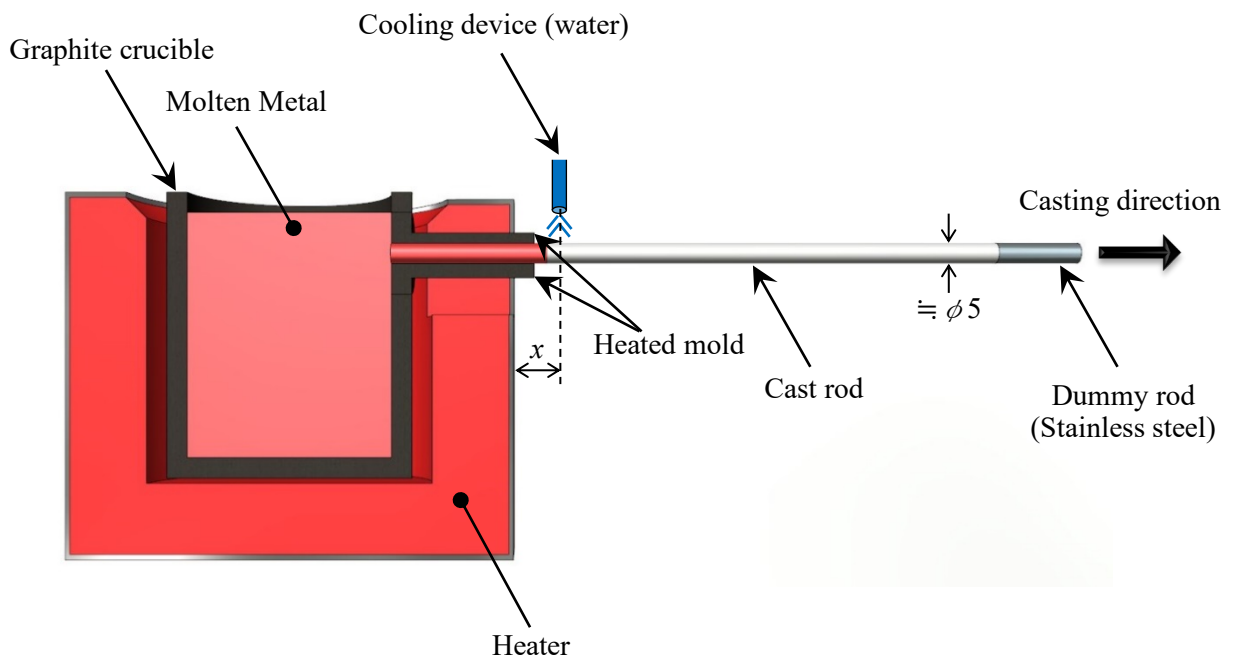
Schematic illustration of the heated mold continuous casting system.
